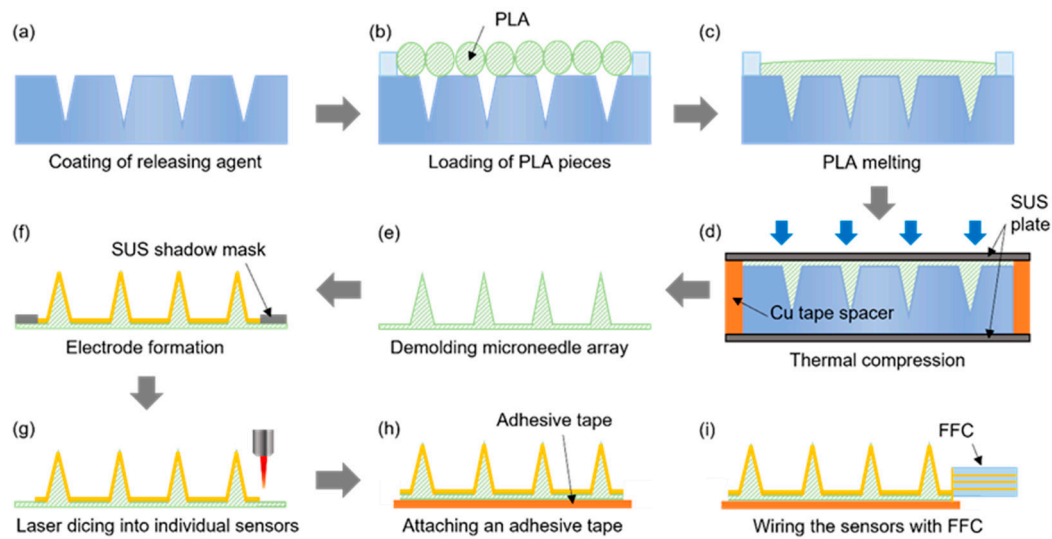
The procedure used to fabricate microneedle sensors. (a) Coating of releasing agent. (b) Loading of PLA pieces. (c) PLA melting. (d) Thermal compression. (e) Demolding microneedle array. (f) Electrode formation. (g) Laser dicing into individual sensors. (h) Attaching an adhesive tape. (i) Wiring the sensors with FFC.
